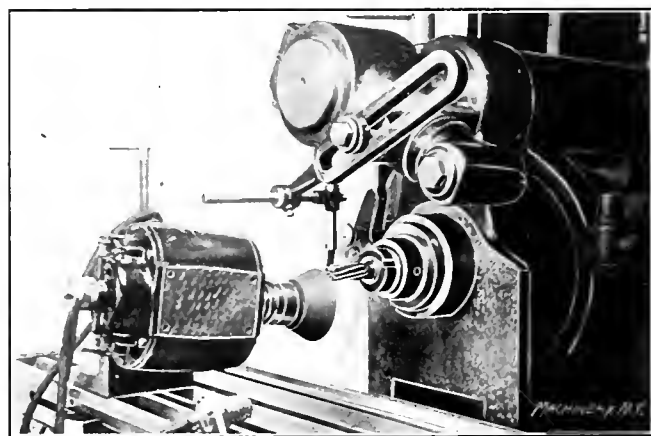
Sharpening the End Teeth of a Small End Mill in place in the Milling Machine Spindle.
